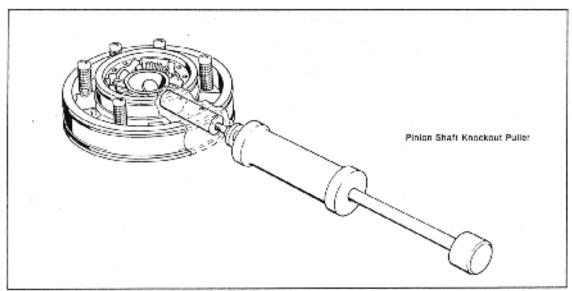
Removal of Pinion Shaft from Gear Carrier.
